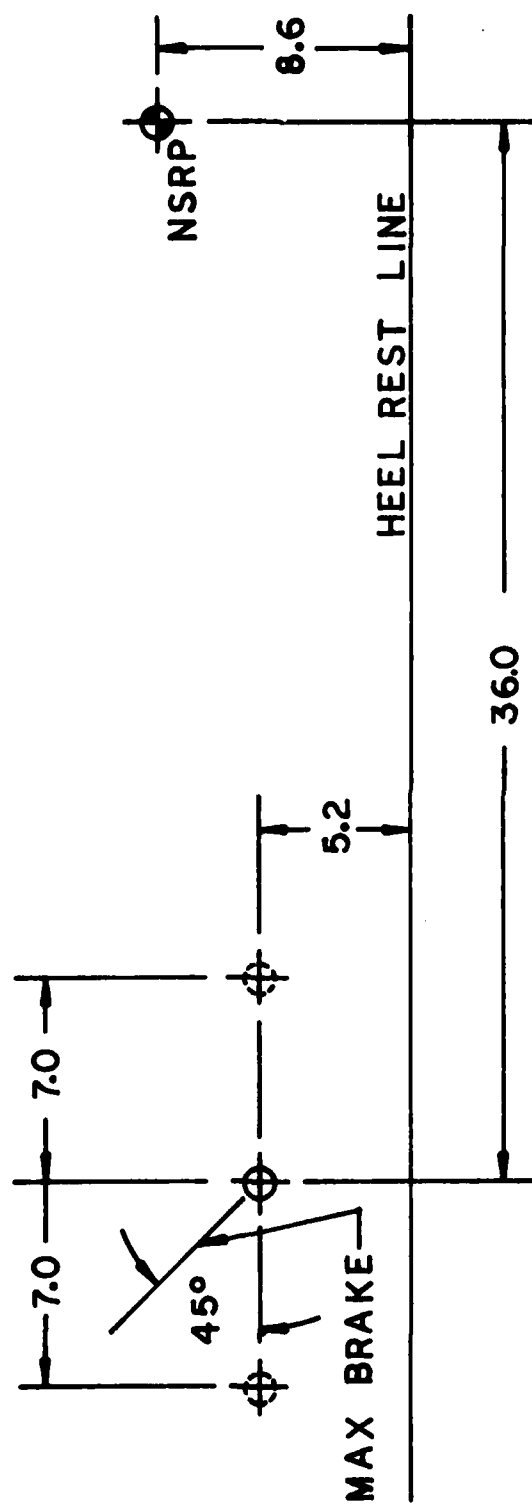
ANTI-TORQUE PEDAL GEOMETRY
